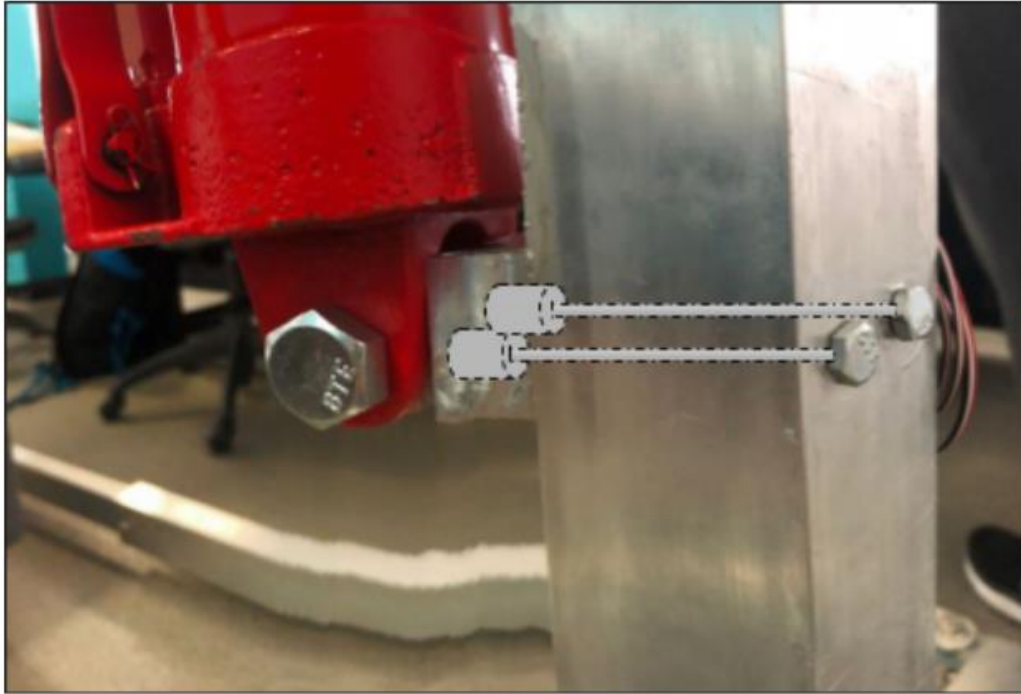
Assembly for the Ratchet Mechanism, Pawl Included
